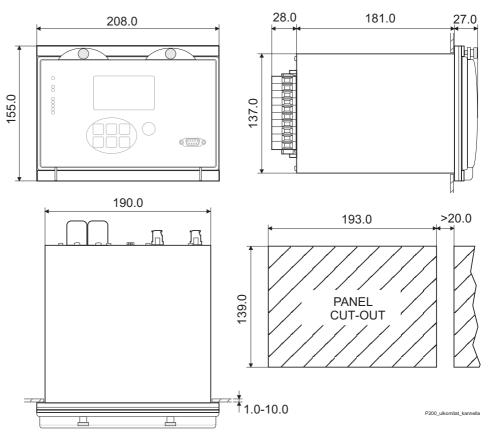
Dimensional drawing and panel cut-out dimensions
